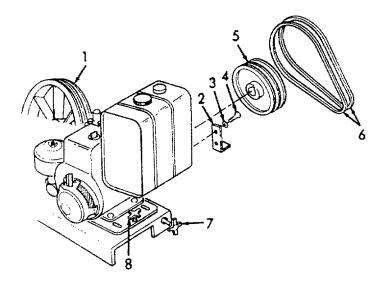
Belts, V, Matched Set and Guide, Removal.
